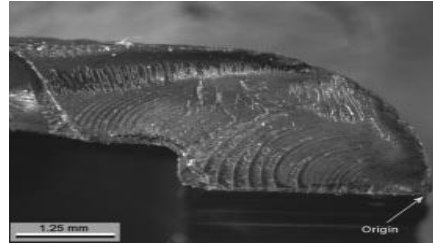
Fatigue striations emanating from fracture origin of polycarbonate latch handle. [3]
